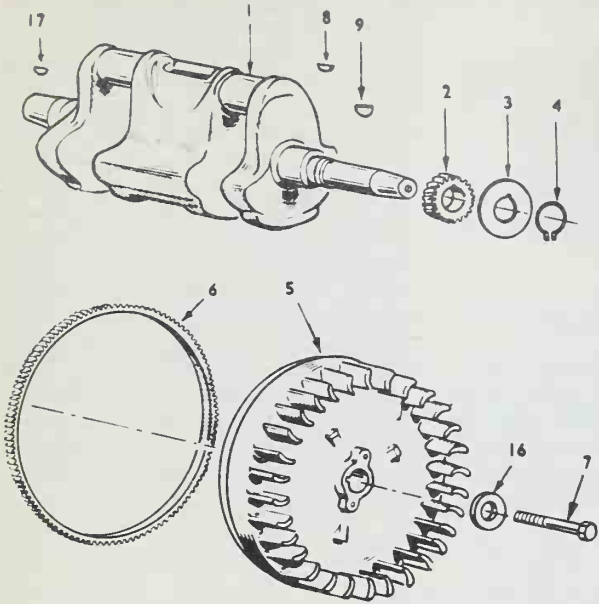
Exploded view of crankshaft and flywheel typical of "J" series. Model DJB shown.
